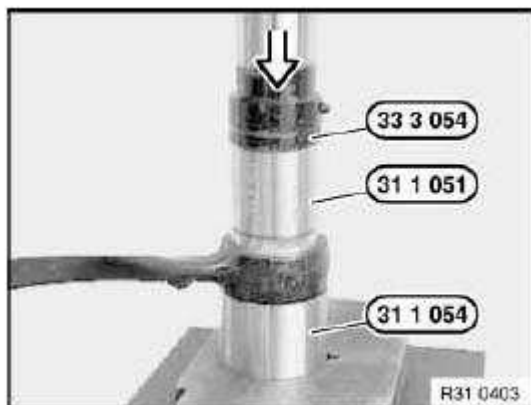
Pressing Rubber Mount Into Control Arm Bore
